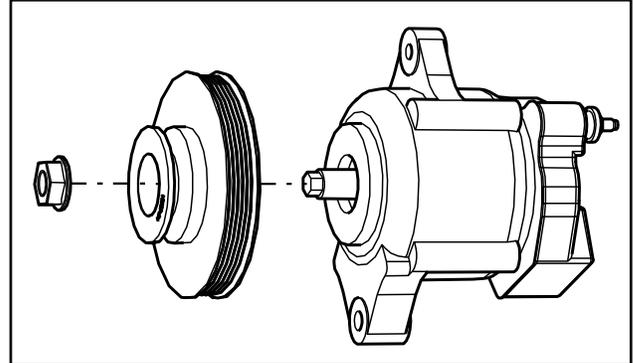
(Double Groove Pulley & OEM Alternator)
